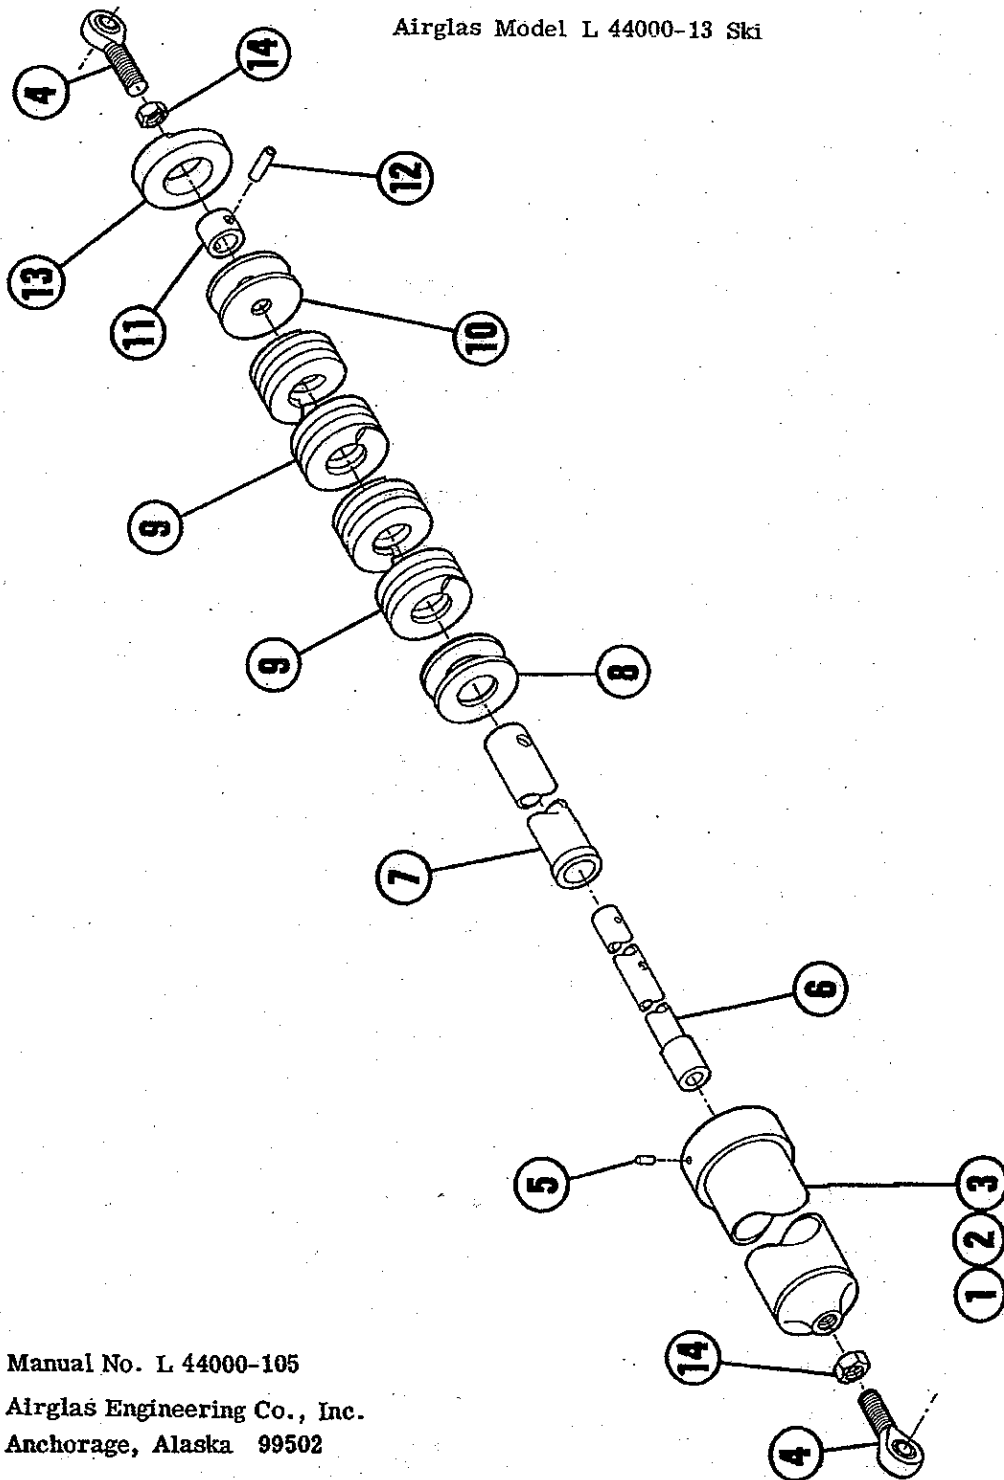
P/N L 44000-19 Spring Cylinder Assy. - Exploded View
